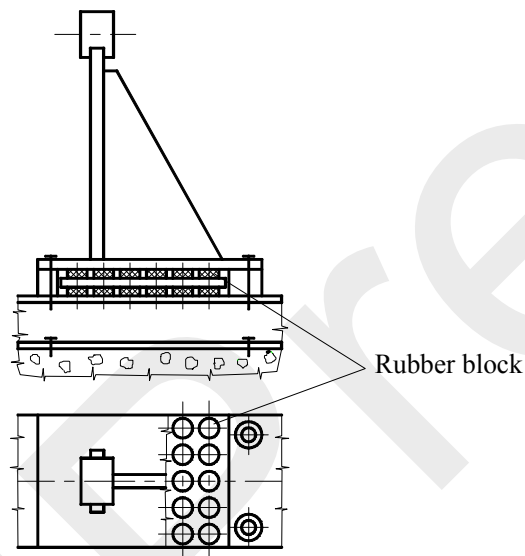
Bearing bracket with adjustable mounting stiffness
